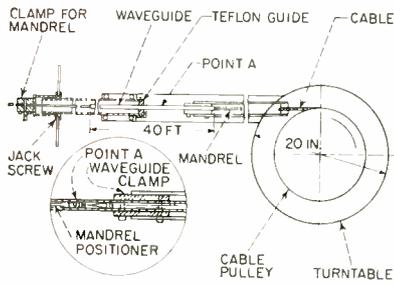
Diagram of waveguide being drawn over mandrel. Portion of waveguide and positioner are in insert
